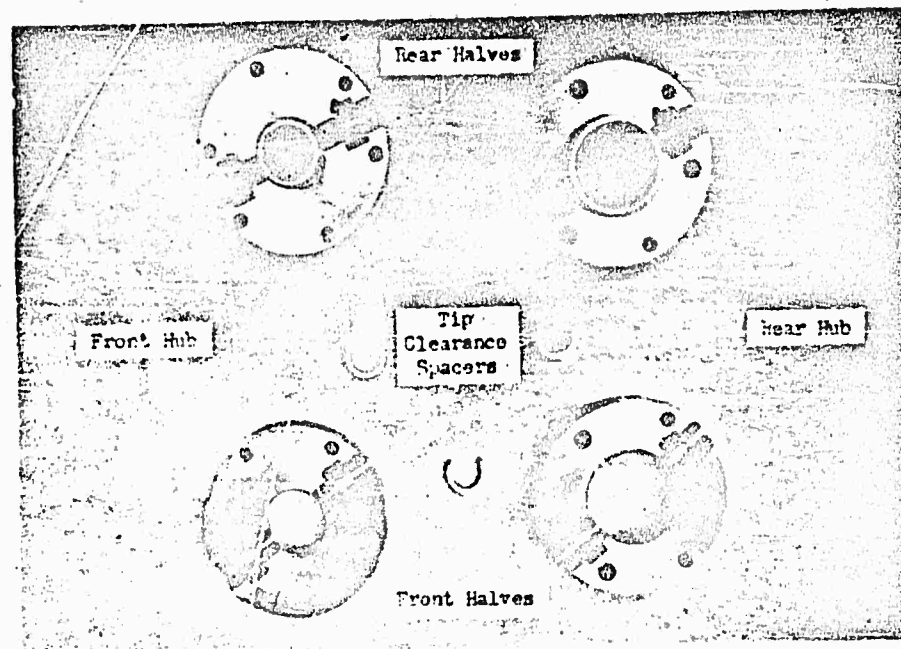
THREE-BLADED PROPELLER HUB ASSEMBLIES
